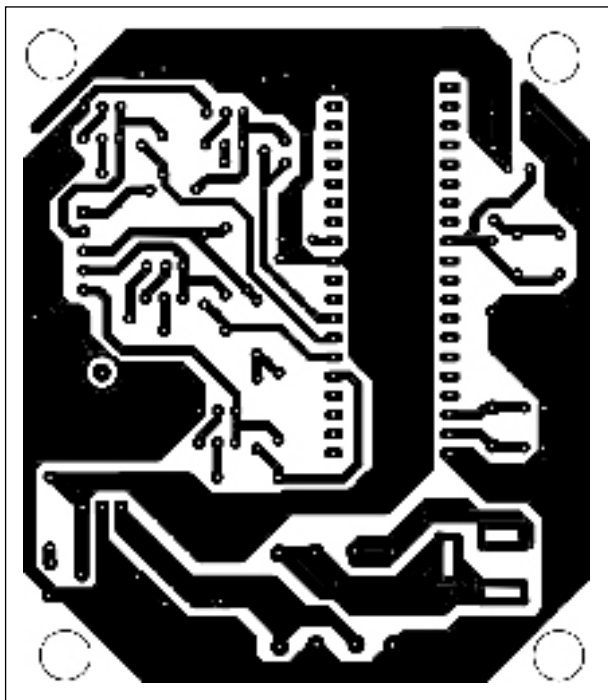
Actual-size, single-side PCB for stepper motor control system using 89C51 microcontroller
